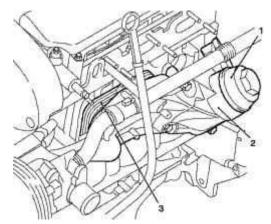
Oil cooler module: 1 - oil filter housing cover, 2 - oil filter housing, 3 - heat exchanger - cooling the engine oil
